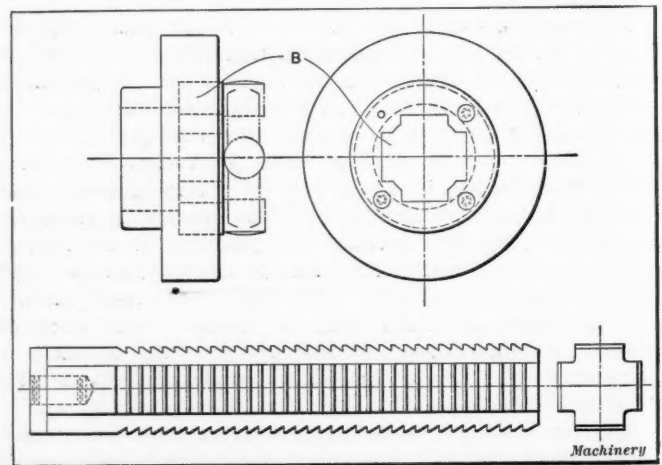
Broaching Fixture and One of the Broaches used for finishing the Inside of the Forgings
